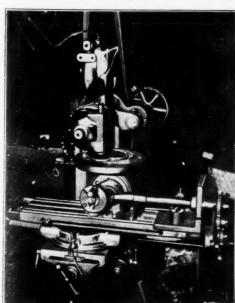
Method of cutting Uniform Rise-and-fall Cams on the Milling Machine
